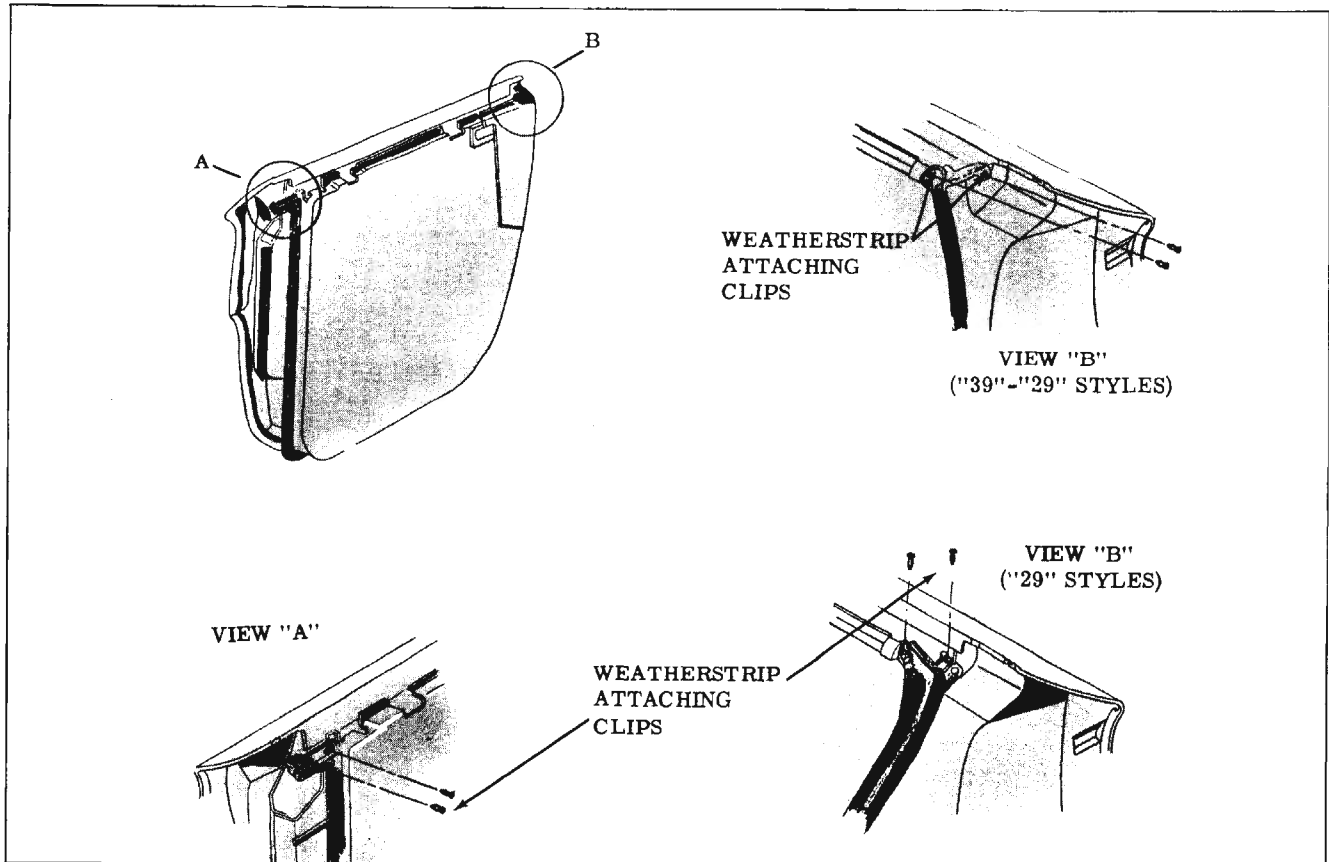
Rear Door Weatherstrip Attaching Clips
